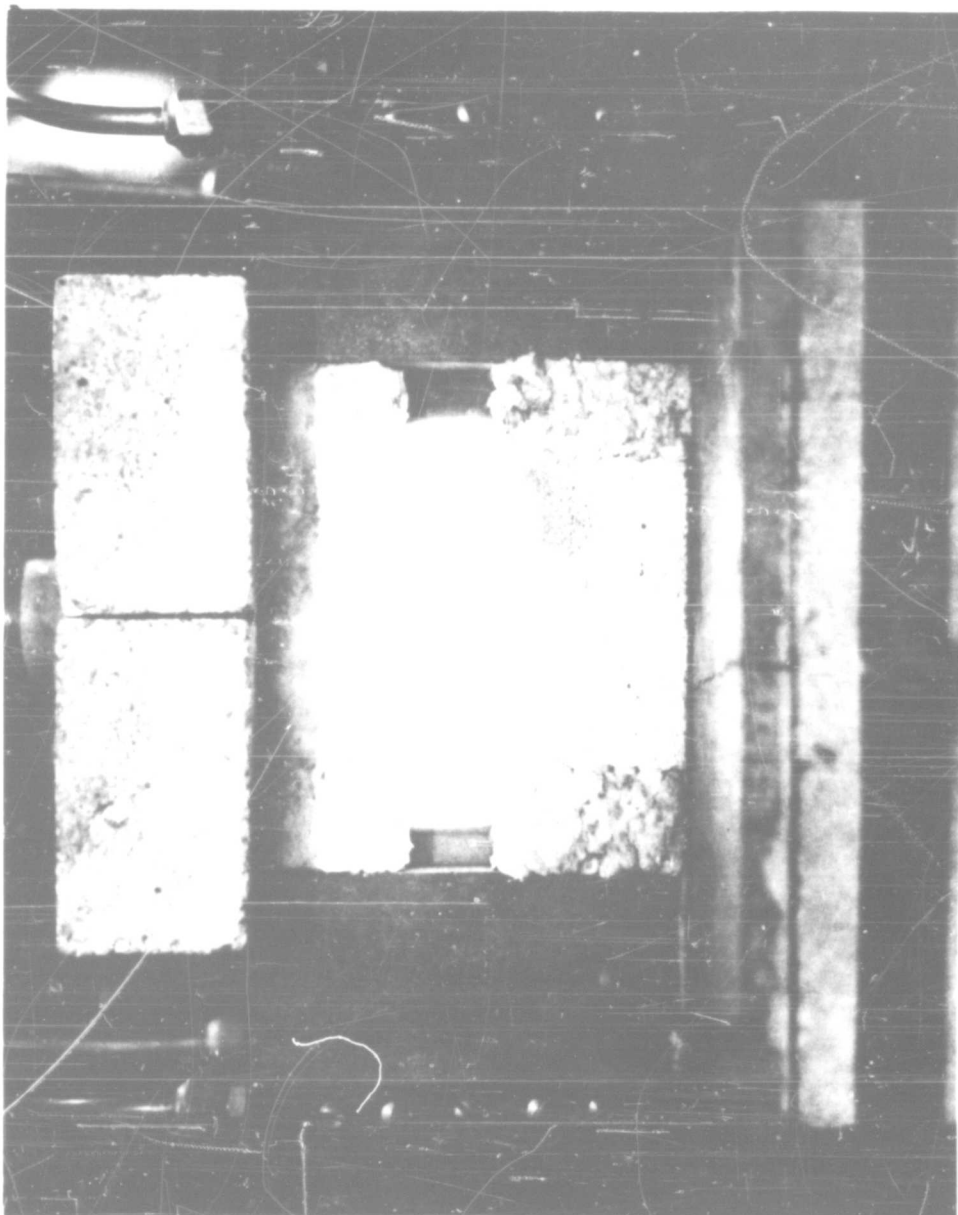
Resistance Hot Press in Operation with Side Insulation Removed
